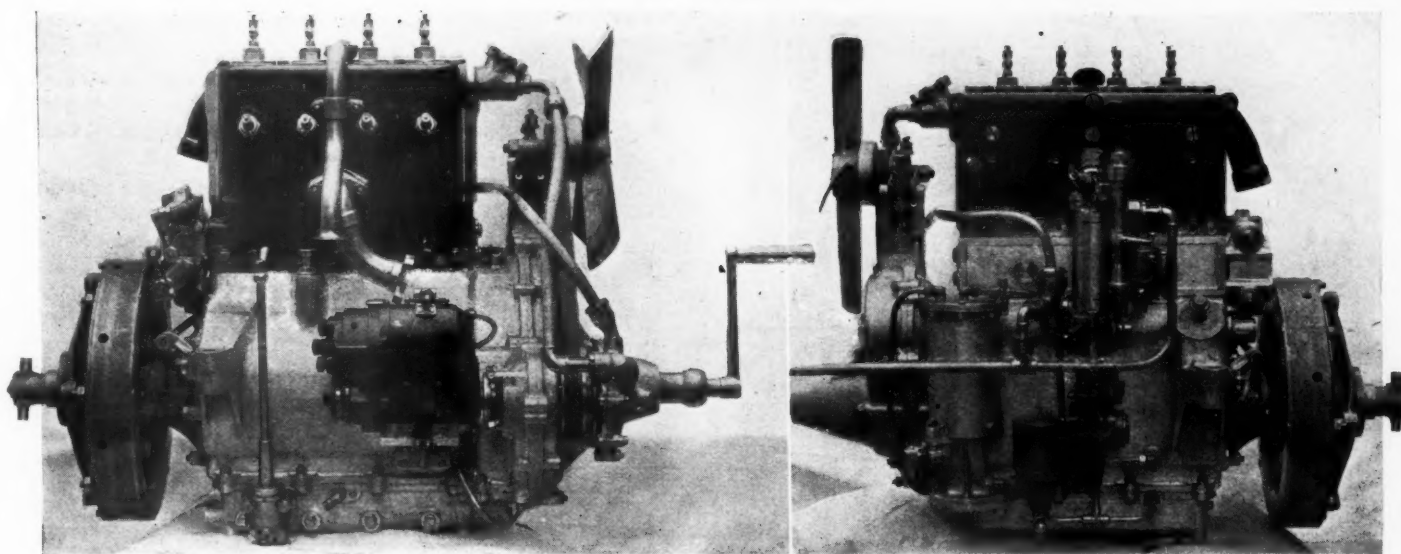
Left—Rockefeller sleeve-valve motor, showing magneto mounting and spark plug location. Fig. 2—Right—Carbureter side Rockefeller motor with kerosene attachment
